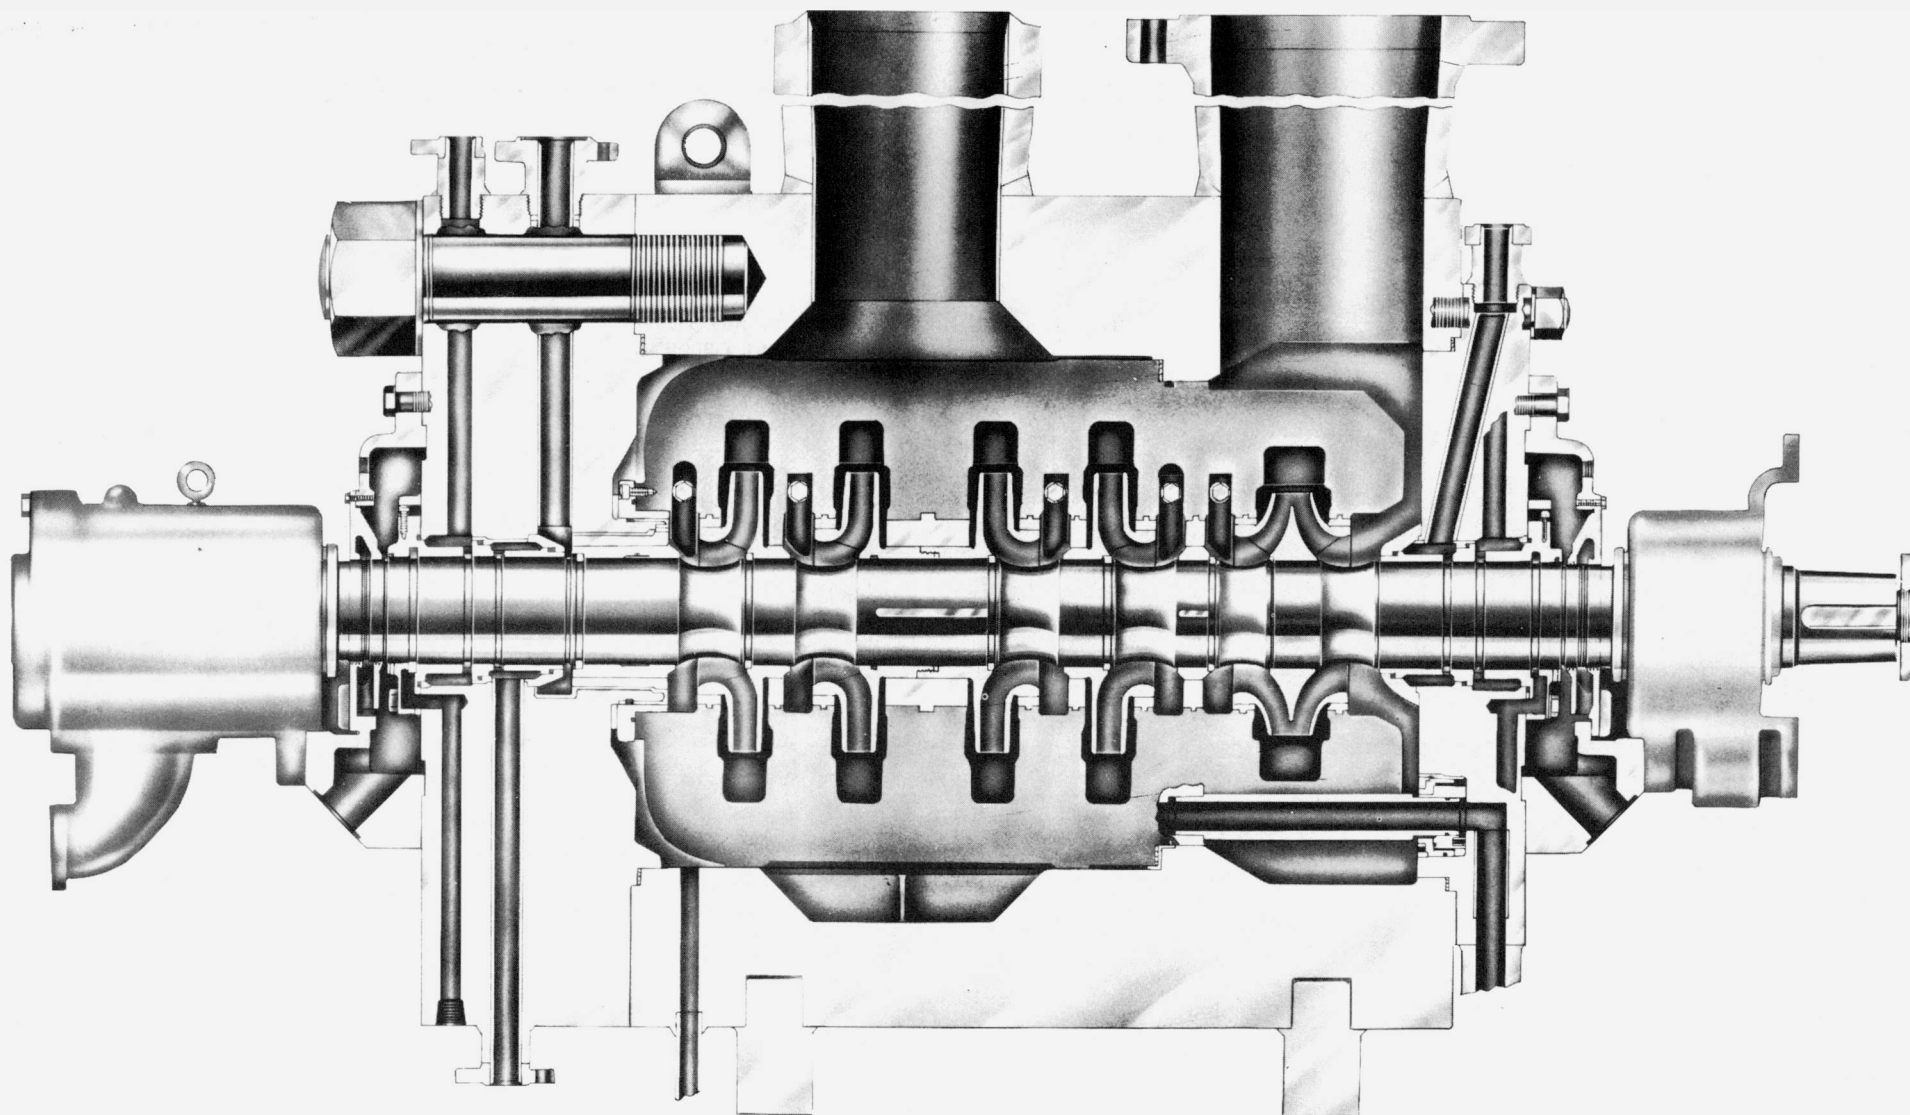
MULTISTAGE DOUBLE CASE BOILER FEED PUMP
